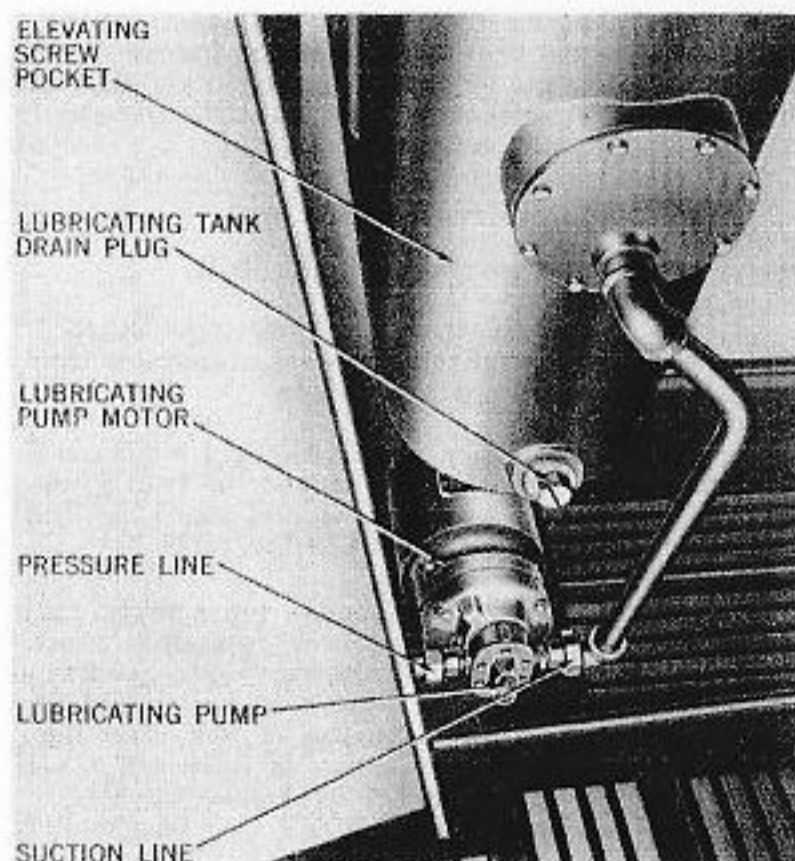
Elevating Screw Lubrication Pump and Cover
